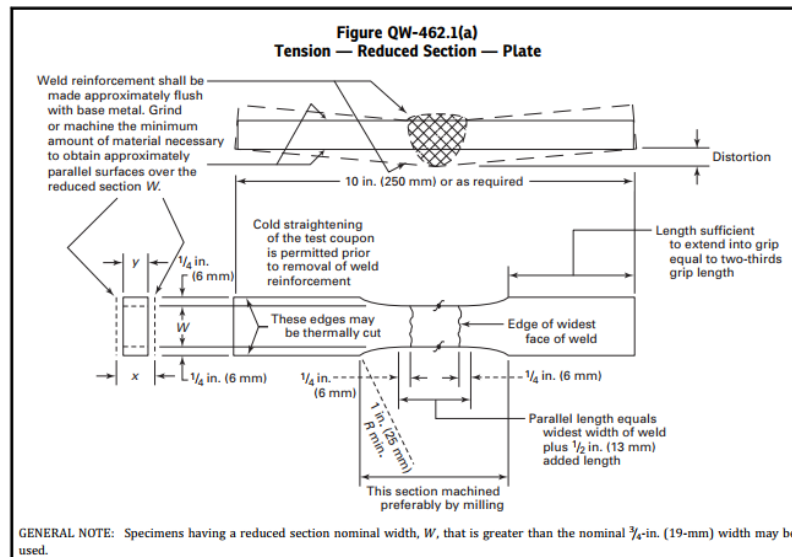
Tensile Test Specimen According to ASME Section IX [6]
